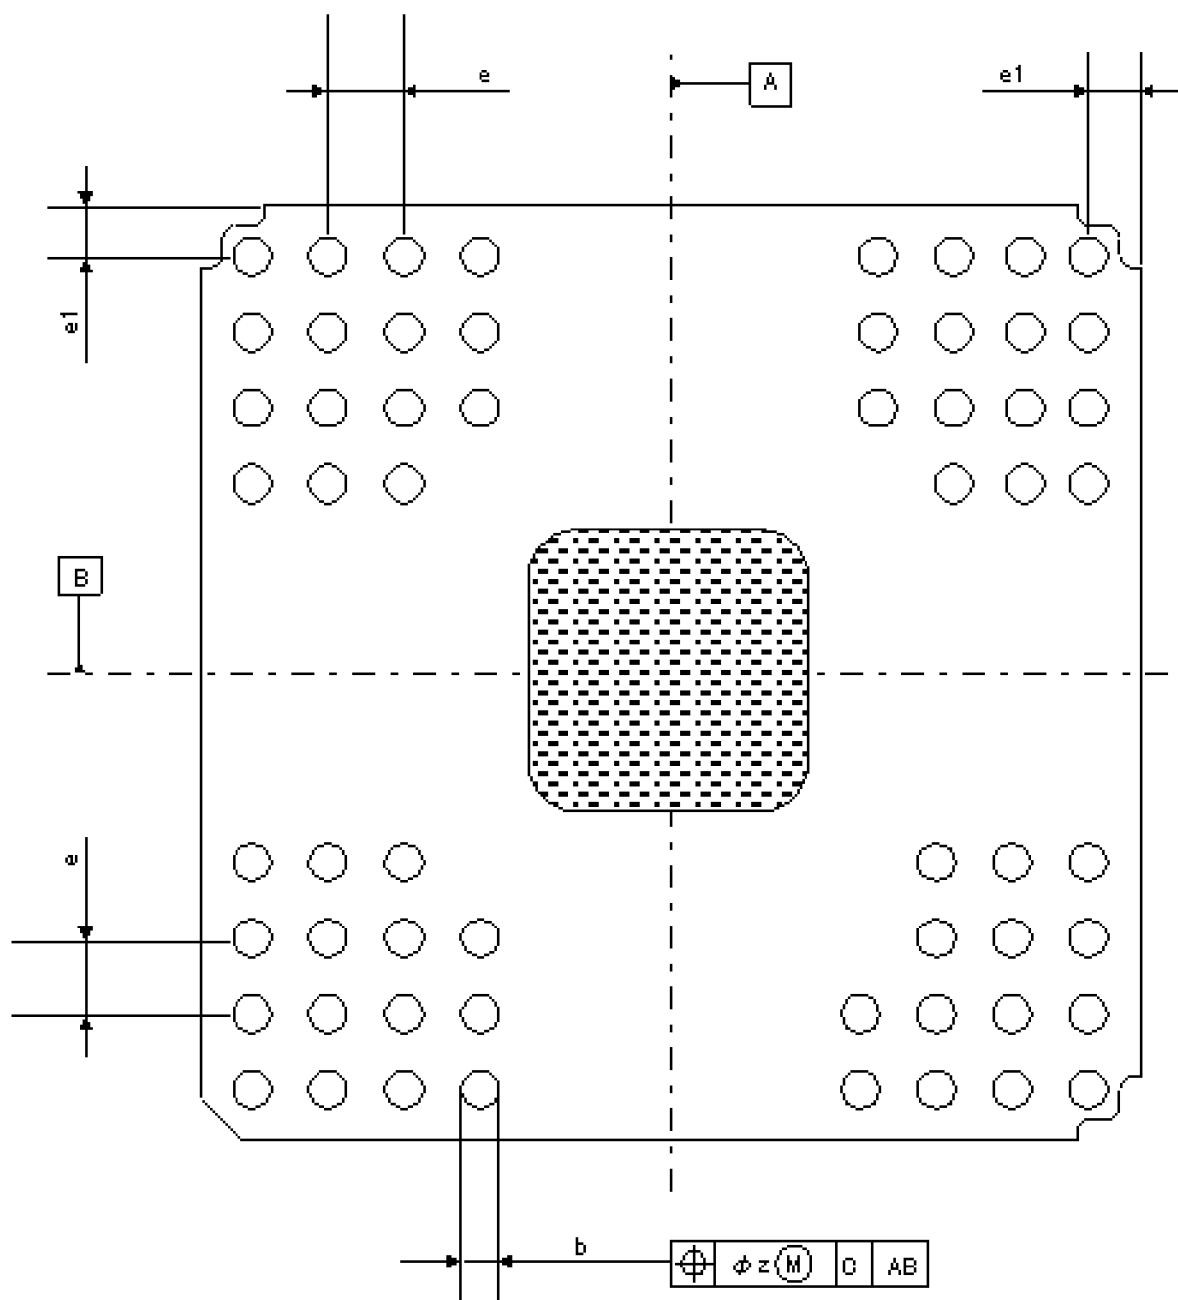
T-BGA256 Outline Dimensions Bottom view
